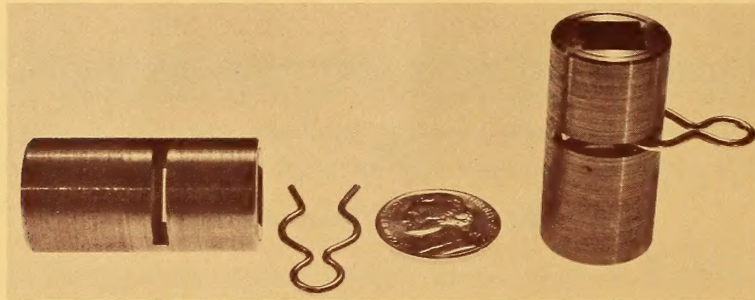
Improved square-holed sleeve adapter with reinforcing sleeve and custom-fitted stainless-steel clip.
